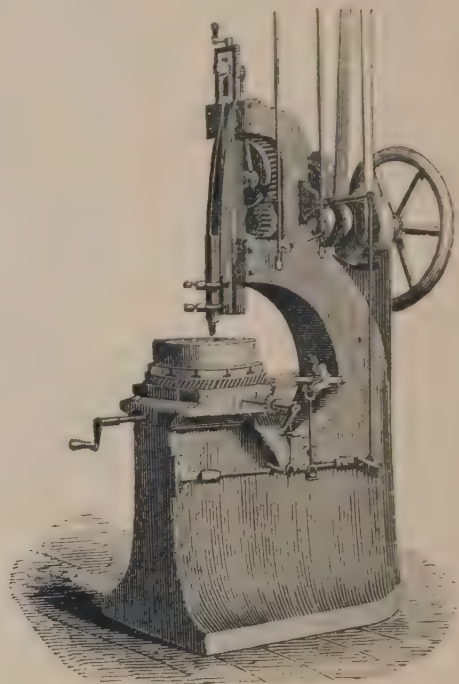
MUIR'S SELF-ACTING SLOTTING AND SHAPING MACHINE.
